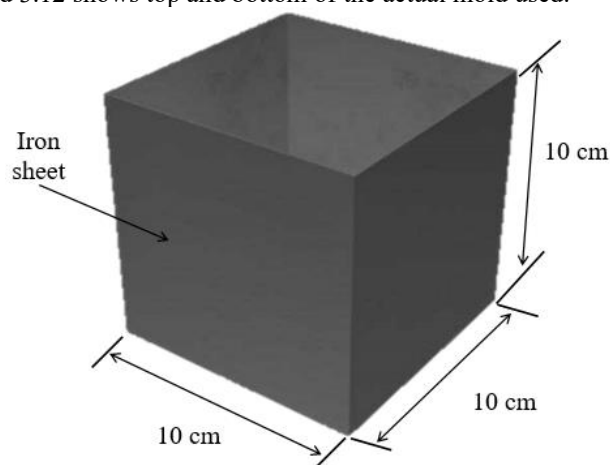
Fabricated Bottom Mold Utilized in the Production of Garden Pot
